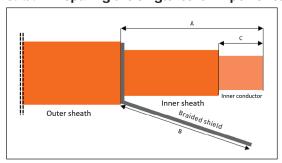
Dimensions for the preparation of single-core HV power cables
